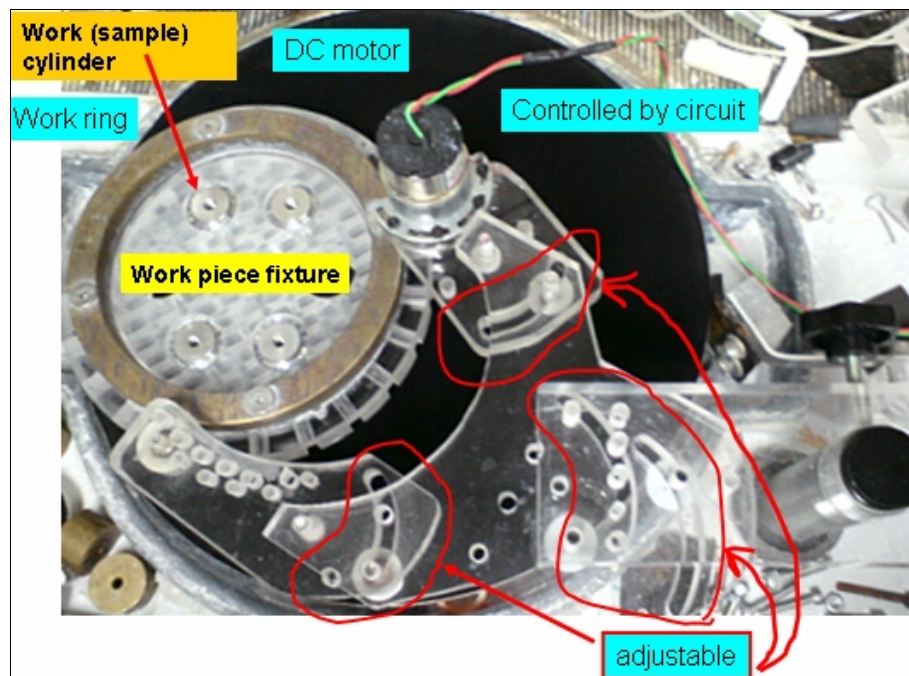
Top view of the whole system we designed and made. The flexible swing jig holder with DC motor fixed on its right arm is shown clearly here.
